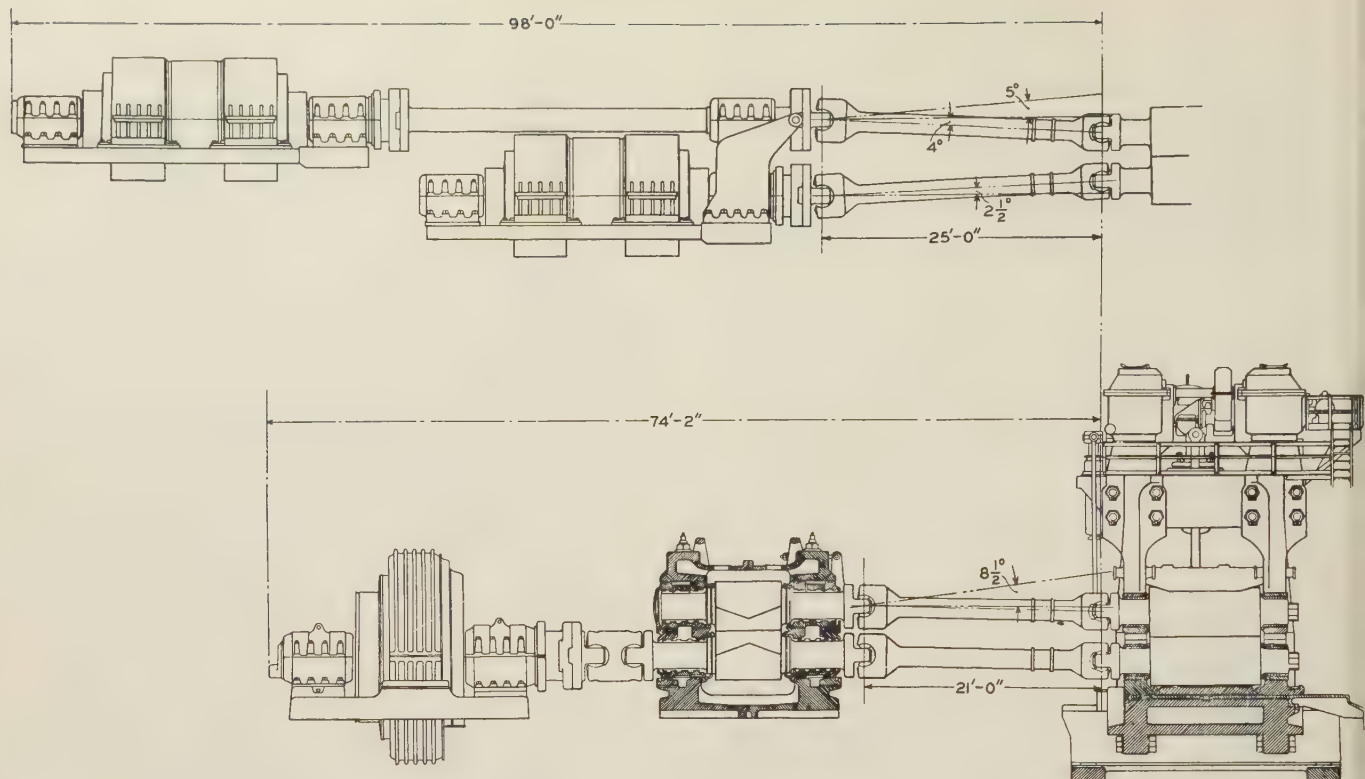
General layout of 10,000-hp. twin-motor drive (above) and 8,000-hp. single-motor pinion drive (below) for 54-in. blooming mill. Note comparative space requirements
